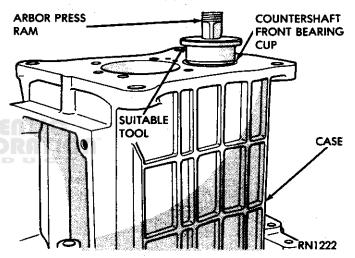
Removing Countershaft Gear Front Bearing Cup
